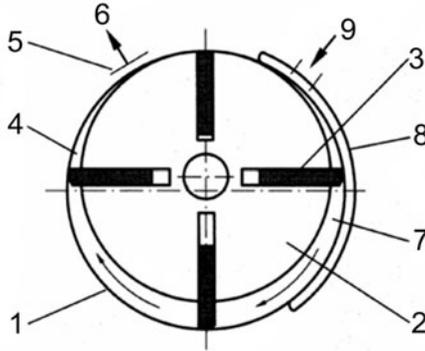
Rotating compressor with blades. Components: 1 body compressor, 2 rotor, 3 blades, 4 high pressure side, 5 exhaust valve, 6 pipe connection, 7 low pressure side, 8 intake valve, 9 pipe connection.
